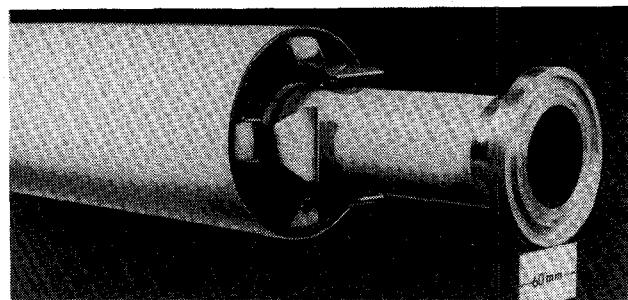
View of sheath, waveguide flange, and roller spring support.
